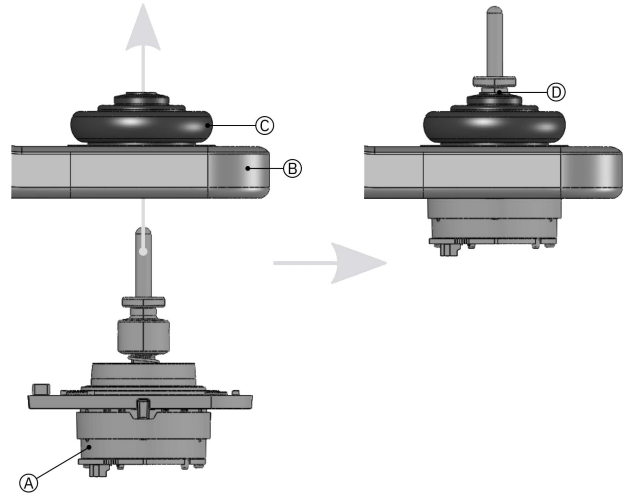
Push the joystick assembly through the chassis and gaiter
